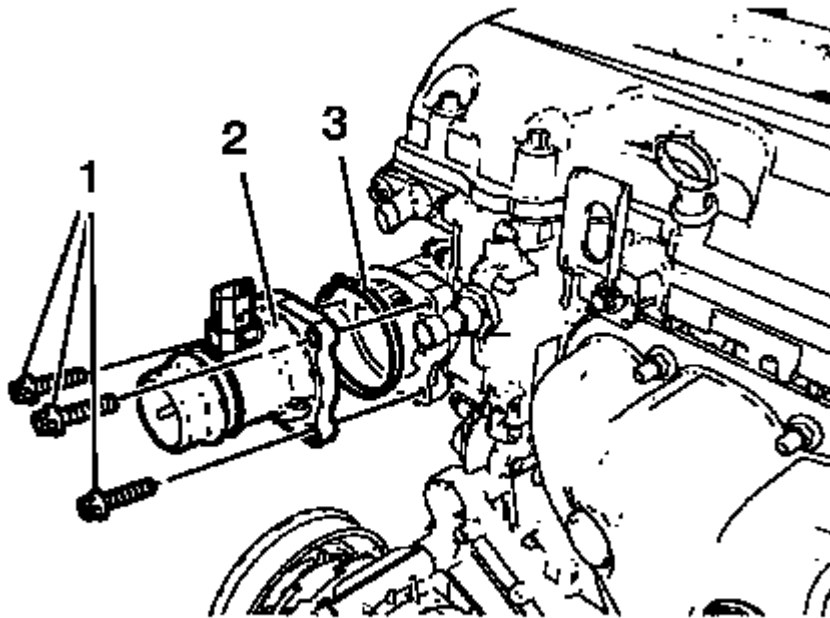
Engine Coolant Thermostat Housing And Bolts
